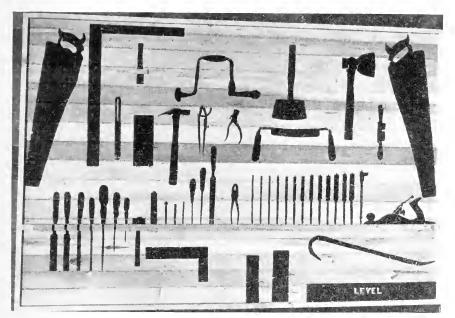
Farm Shop Woodwork Tool Rack with Tools Removed.
